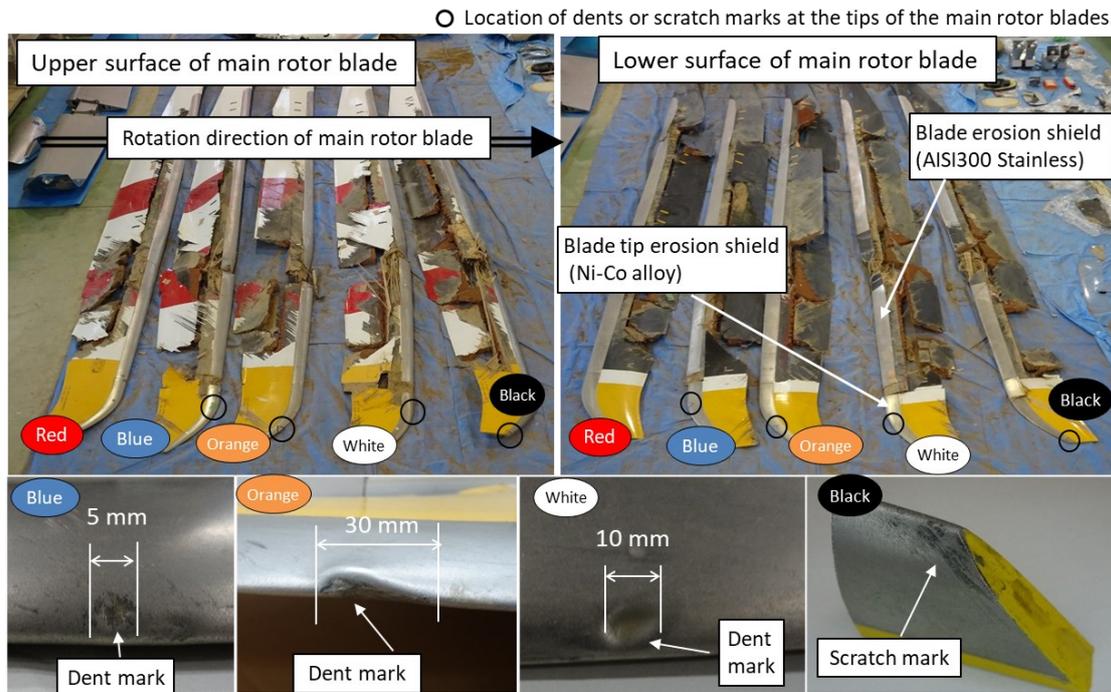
Wreckage of main rotor blades and the locations of the dent or scratch marks on the main rotor blades
